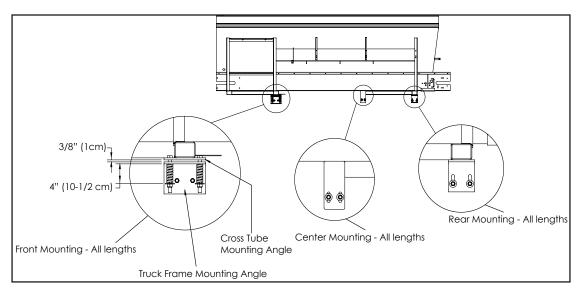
Mounting Angle Installation - NL4500G4 Edge
